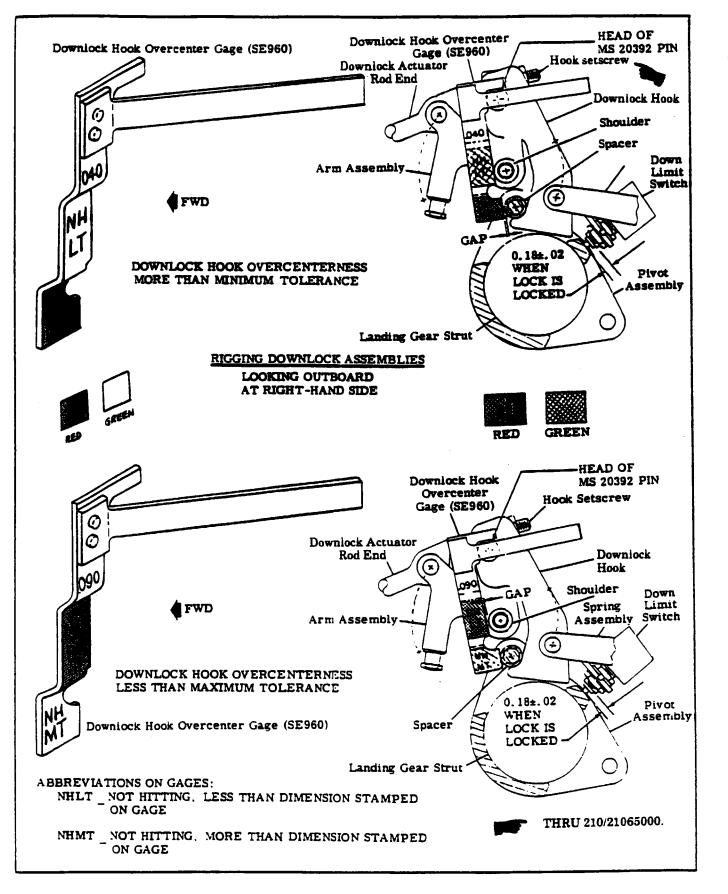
Rigging Main Landing Gear (Sheet 2 of 3)
